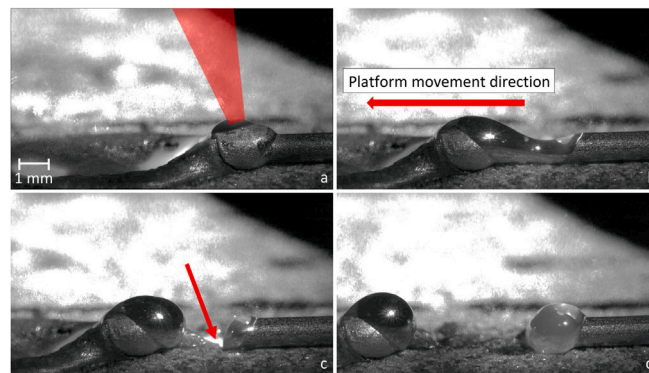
High-speed footage of an attempt to weld a stainless steel wire to olivine. Seen in frame a is a crater caused by the delay between turning on the laser and moving the platform. It completely melted the wire, which formed a bulb on the right side of the frame, which was taken just as the laser spot began moving from the crater. Frame b is 288 ms later, after the laser has passed over the bulb, and began heating the wire, which are both molten. Just before frame c (at 308 ms), the wire breaks as a result of the surface tension from the bulb on the left and the molten bead on the right pulling it apart. The arrow shows that the laser spot is spanning both the wire and the olivine beneath. The final frame (d at 528 ms) shows the molten bead following the laser spot.
